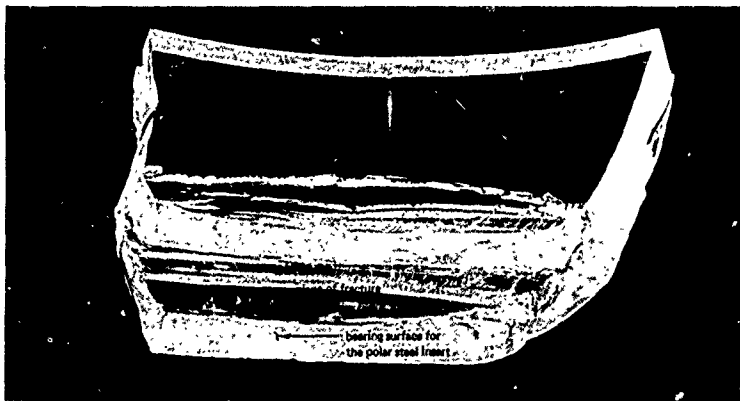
Fragment from the bottom polar acrylic plastic pentagon. Note that serious spalling has taken place on the beveled bearing surface initiated at the location that corresponds to the O-ring groove on the bottom steel plate. Mechanism of failure is shown in Figure 119c.
